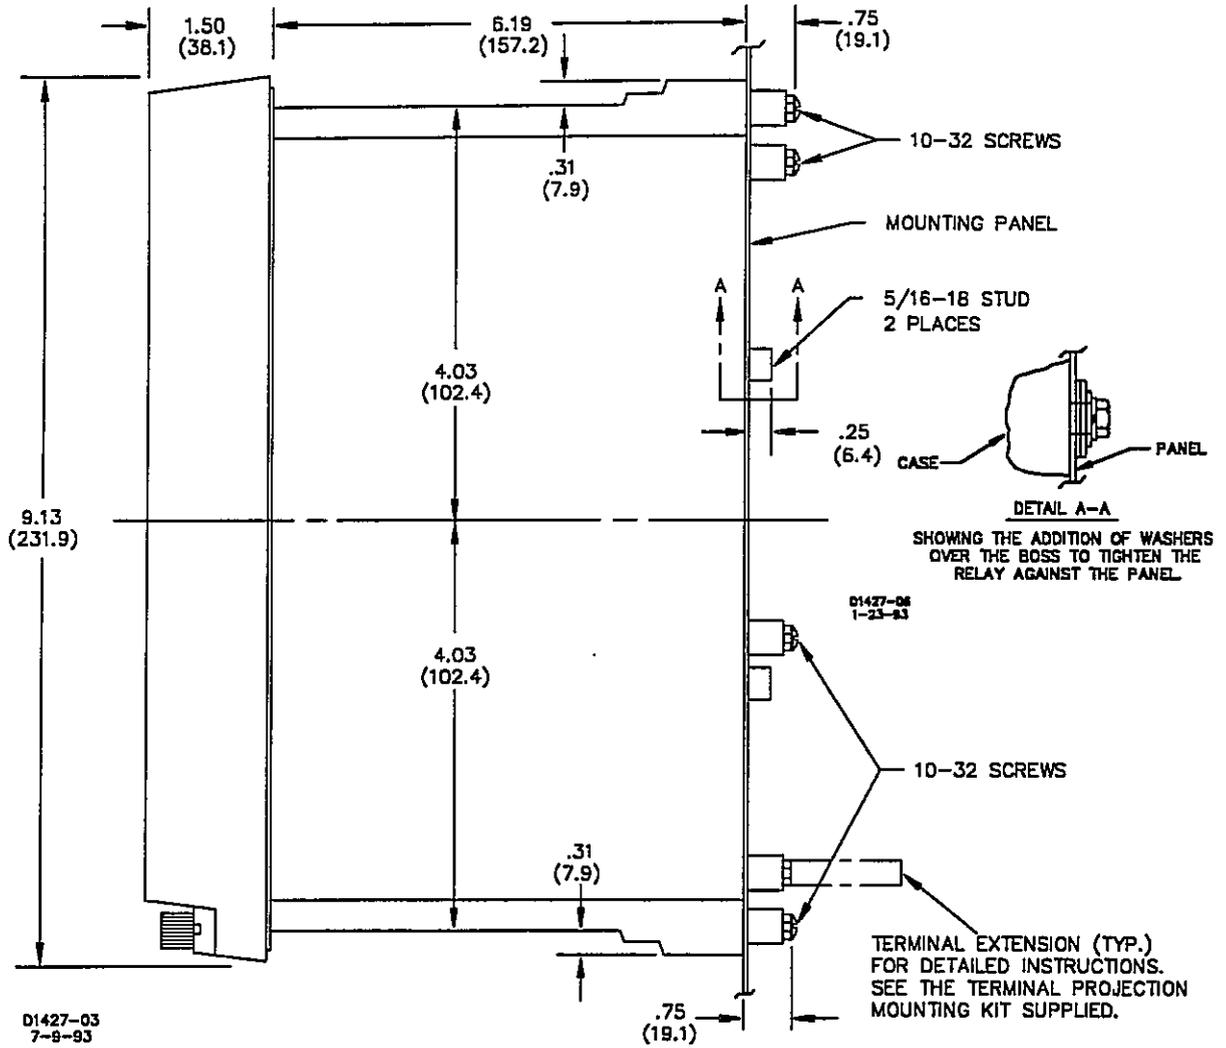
S1 Case, Double-Ended, Projection Mounting, Side View
